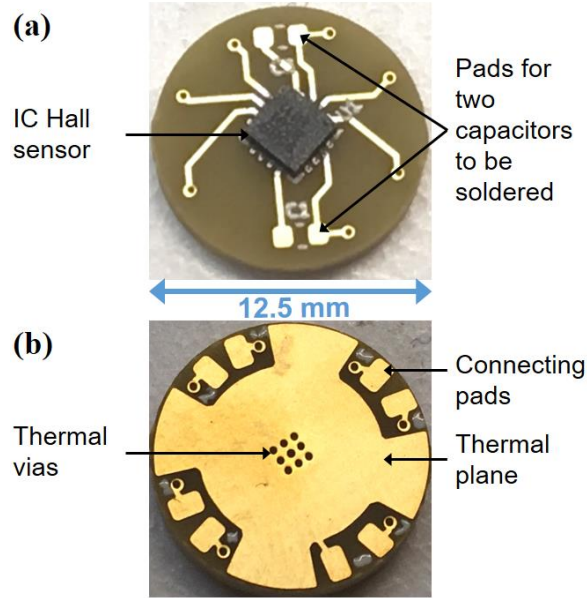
Photographs showing both sides of the printed circuit board (PCB) holding the IC Hall sensor before being soldered to the rod. (a) The sensor is soldered at the centre of the PCB and two capacitors are added for filtering purposes. (b) The thermal plane is connected through thermal vias to the thermal pad of the IC Hall sensor. Connecting pads are placed to access the Hall sensor pins.
